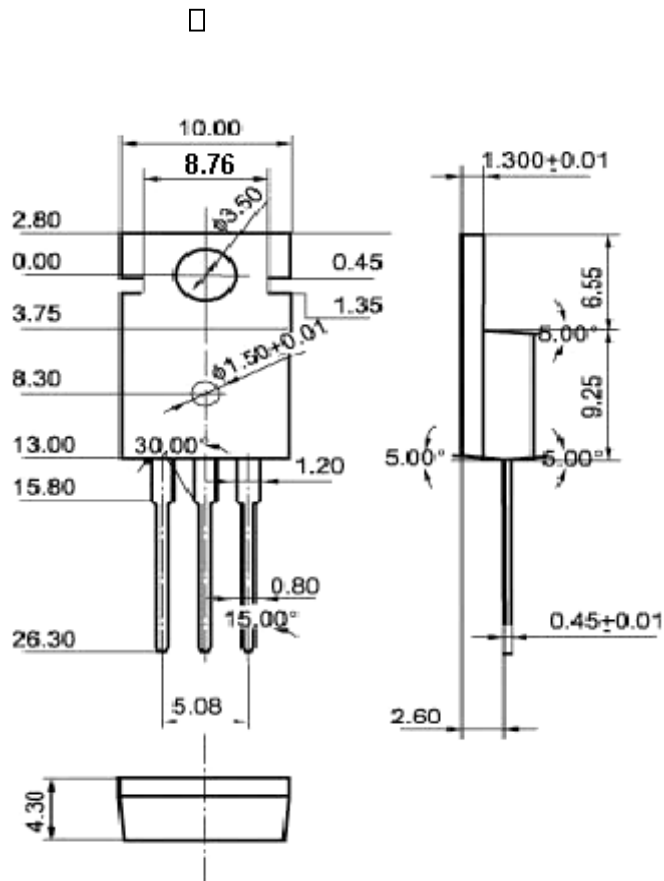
Outline dimensions (unindicated tolerance: ± 0.10 mm)
